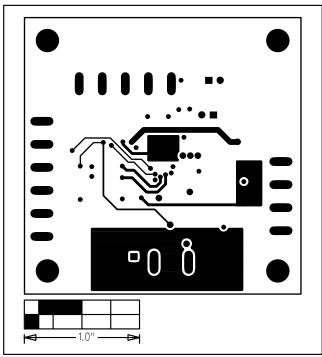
MAX8739 EV Kit PC Board Layout—Inner Layer 2
